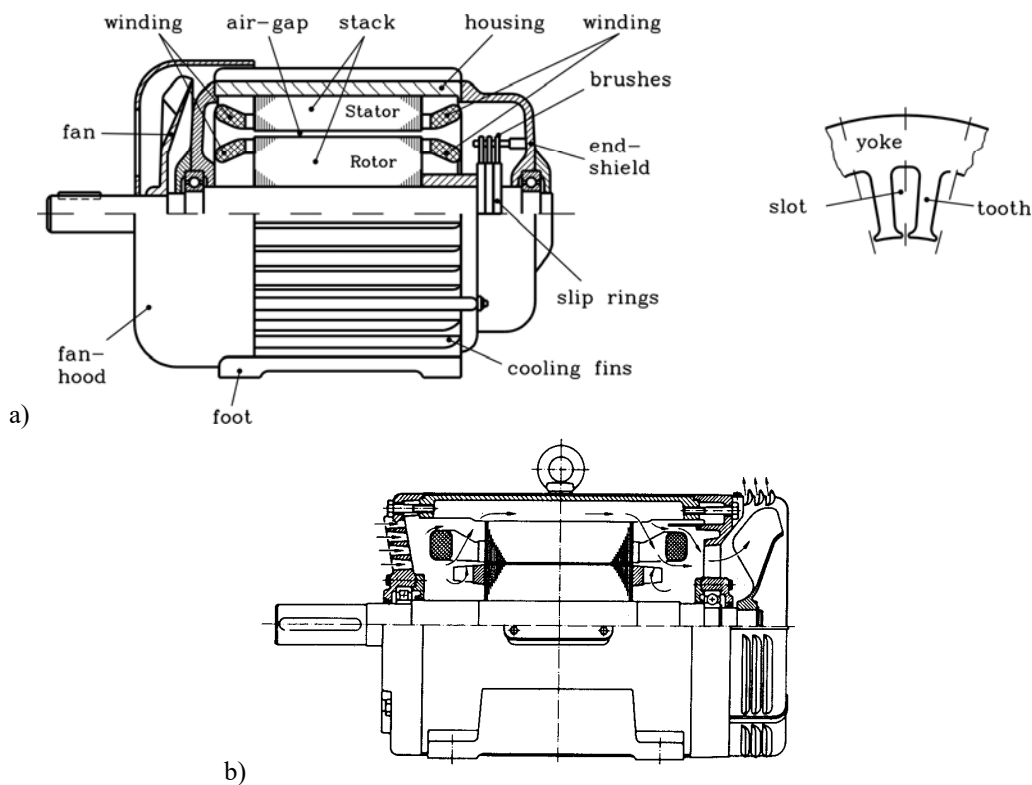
Examples of cooling systems: a) IC 41: Shaft mounted fan, fan hood for guiding air flow with air inlet opening, totally enclosed slip-ring induction machine, cooling fins on motor housing, b) IC 01: Shaft mounted fan, open ventilation, cage induction machine, end shields with openings for coolant flow, fan hood for guiding coolant flow with openings for air outlet, additional small fan blades on cage ring for rotor cooling air flow
